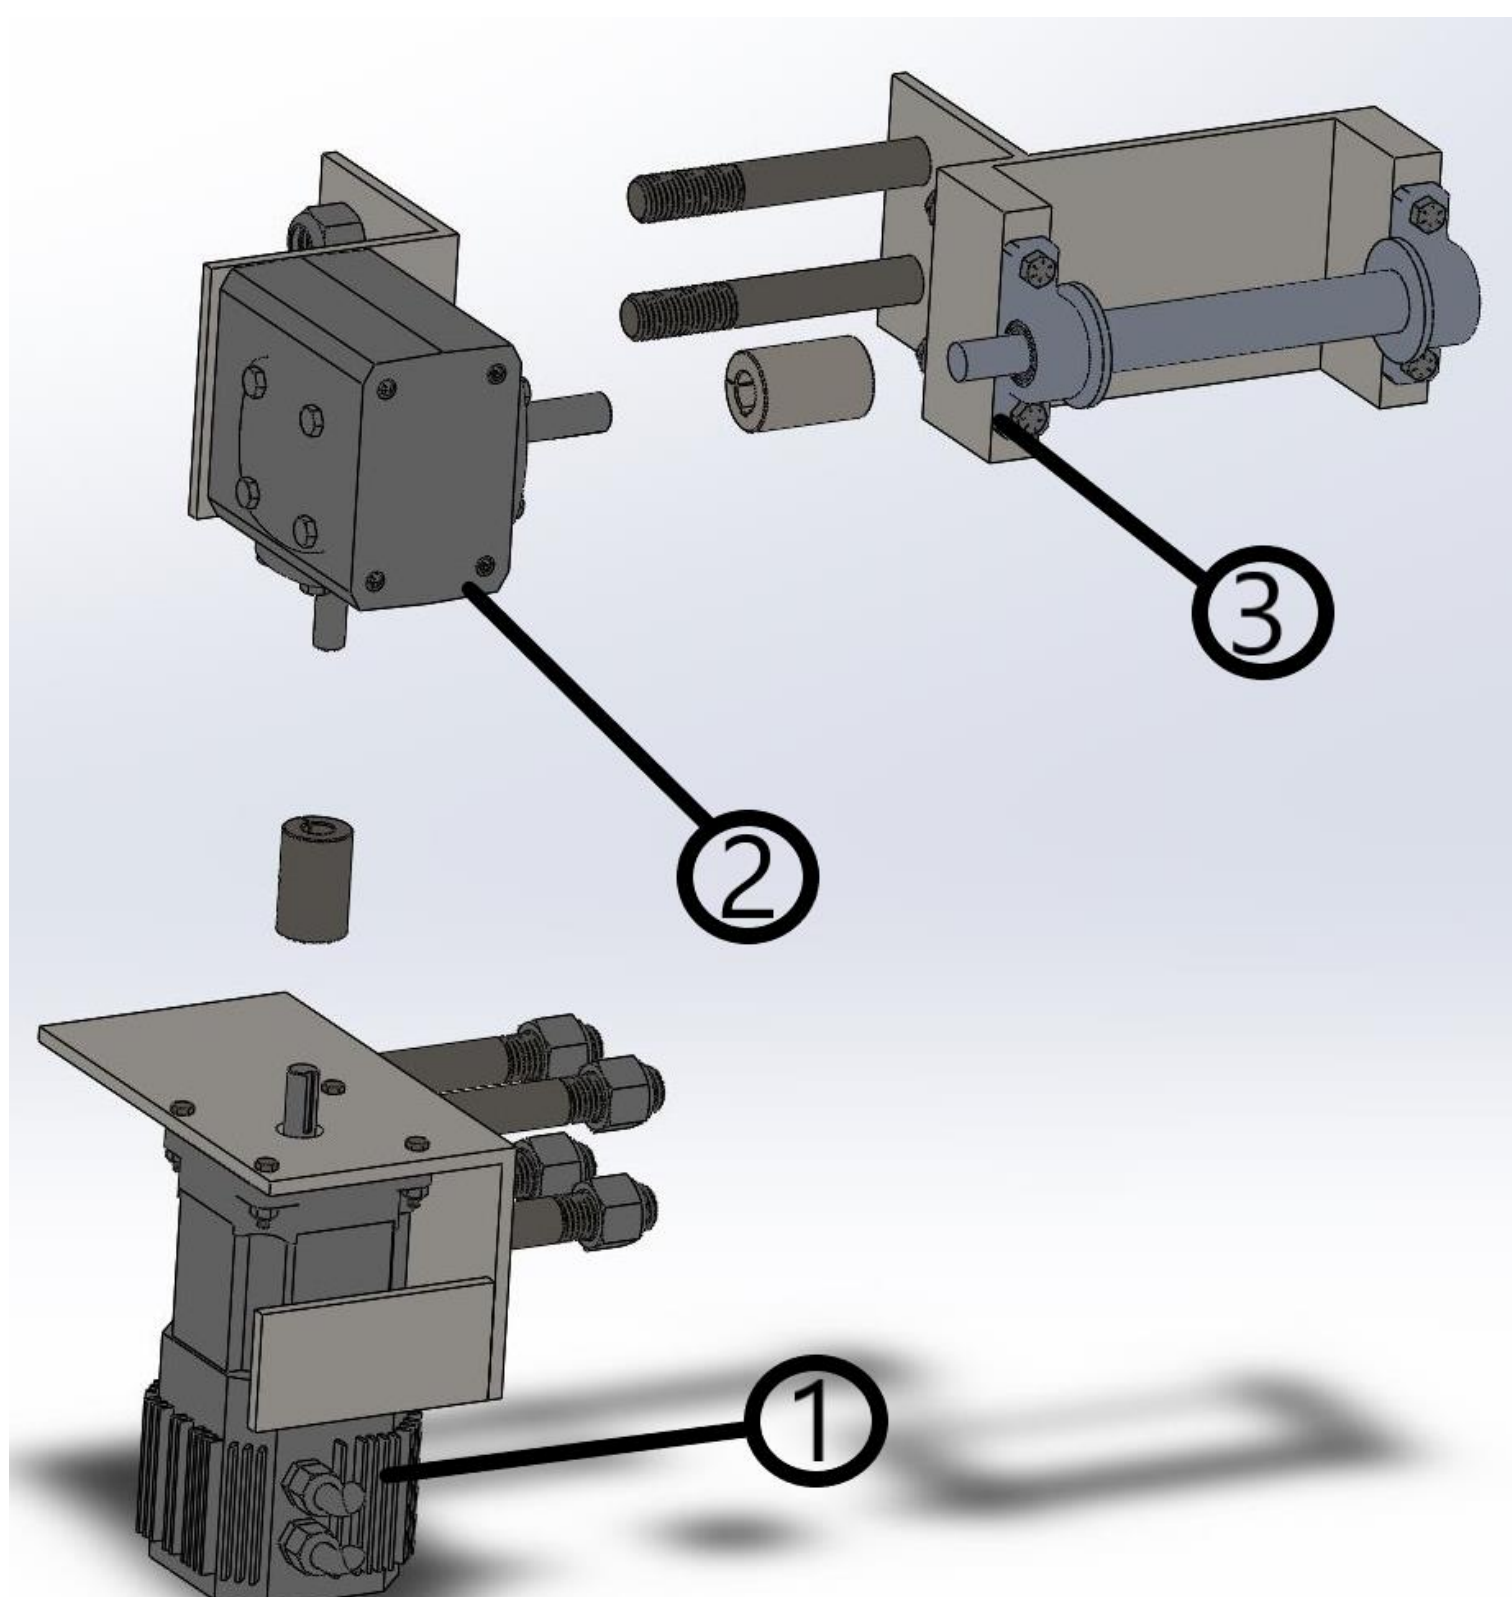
Exploded view of the hoist and suspension system components which are inside the box from Fig. 2. Depicted here is a motor (1) attached to a speed reducer (2) which provides power to the spool (3). In addition to the main motor mount, there is also a side support to reduce motor instability due to vibrations.
